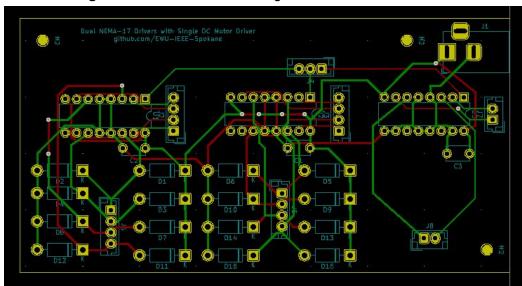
Trace view of the first PCB design. Notice the poor layout of components, long traces, excessive vias necessary, and ridiculous daisy-chained power supply with slim traces.
